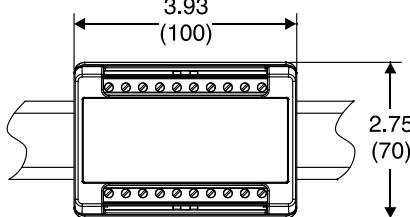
Wide Case Size in Inches (millimeters) (Front View)
